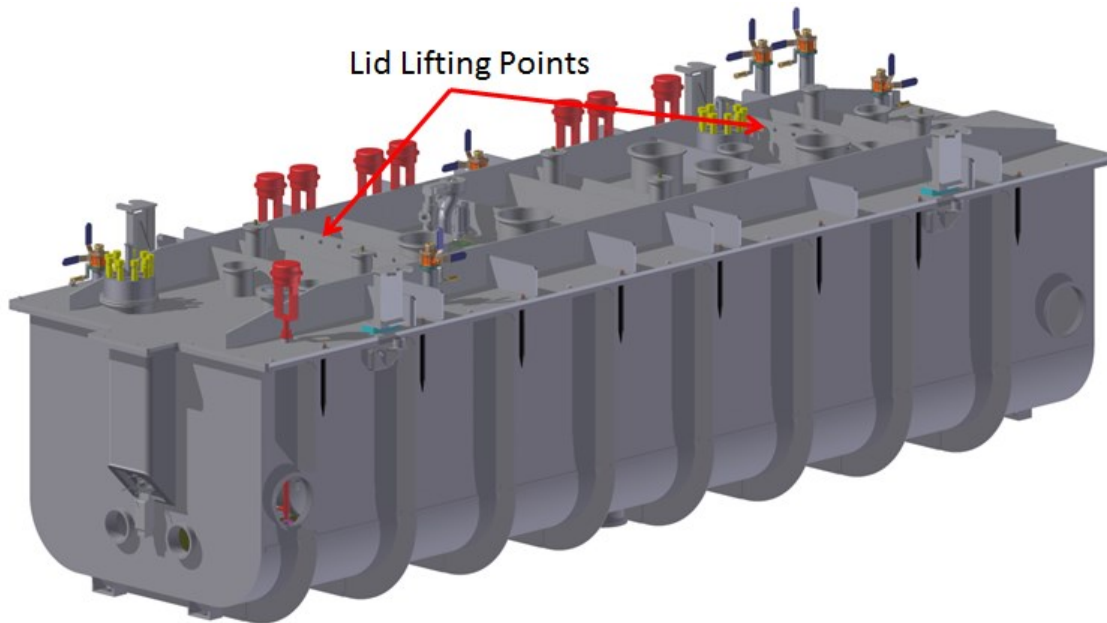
Locations for lifting from the lid. The gussets are located 123.7" apart and each gusset has 6, 1-1/8" clearance holes, spaced on 5" centers for lifting. These gusset are engineered to support the weight of the entire cryomodule assembly.
